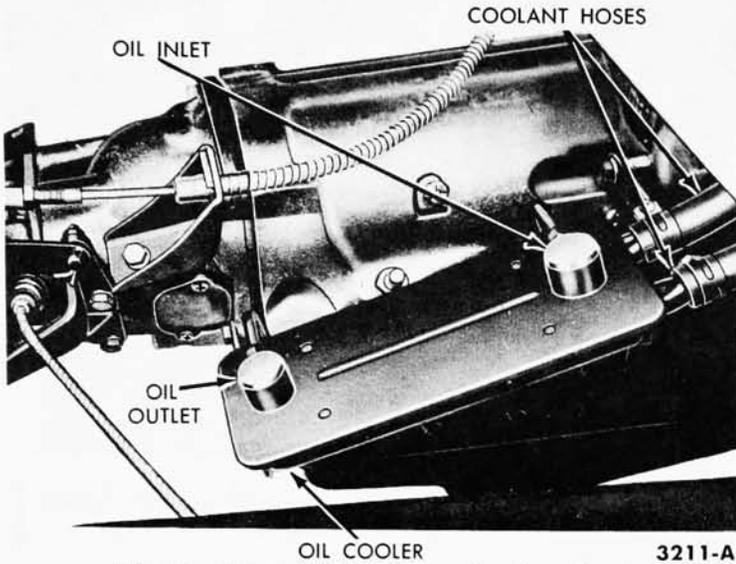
Oil-to-Water-Type Cooler—Truck 3211-A
